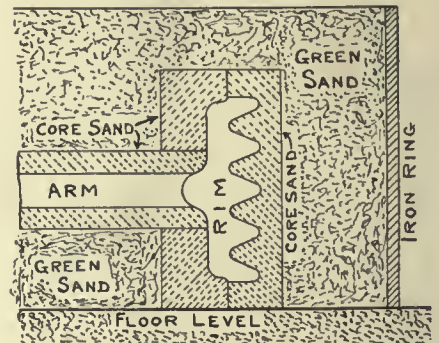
METHOD OF MOULDING LARGE PULLEYS.
